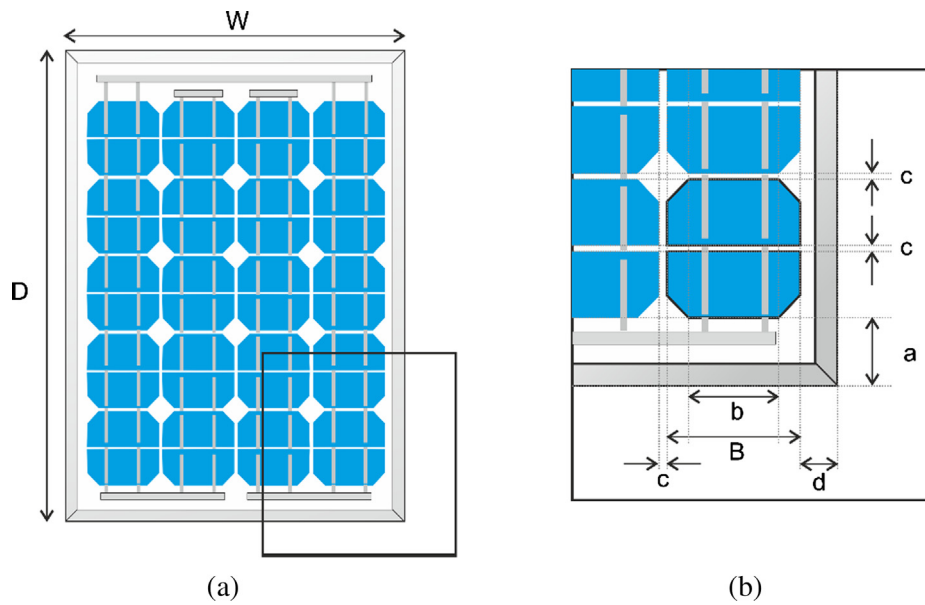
Technical drawing of the solar panel ET-M54050A: (a) panel external dimensions, (b) details of cells placement.
